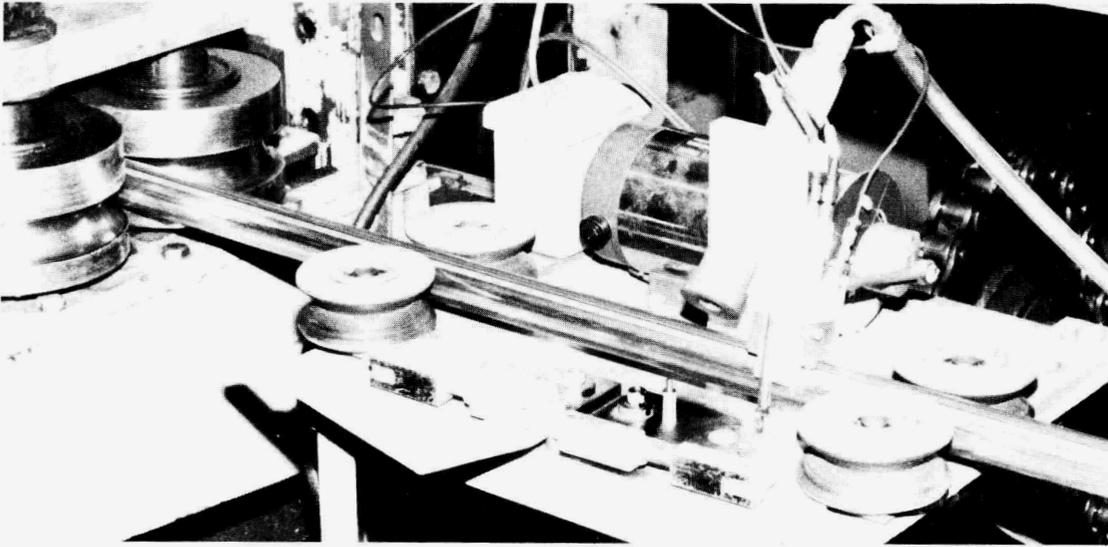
Sheath weld scanner used at Oxford-Airco.
